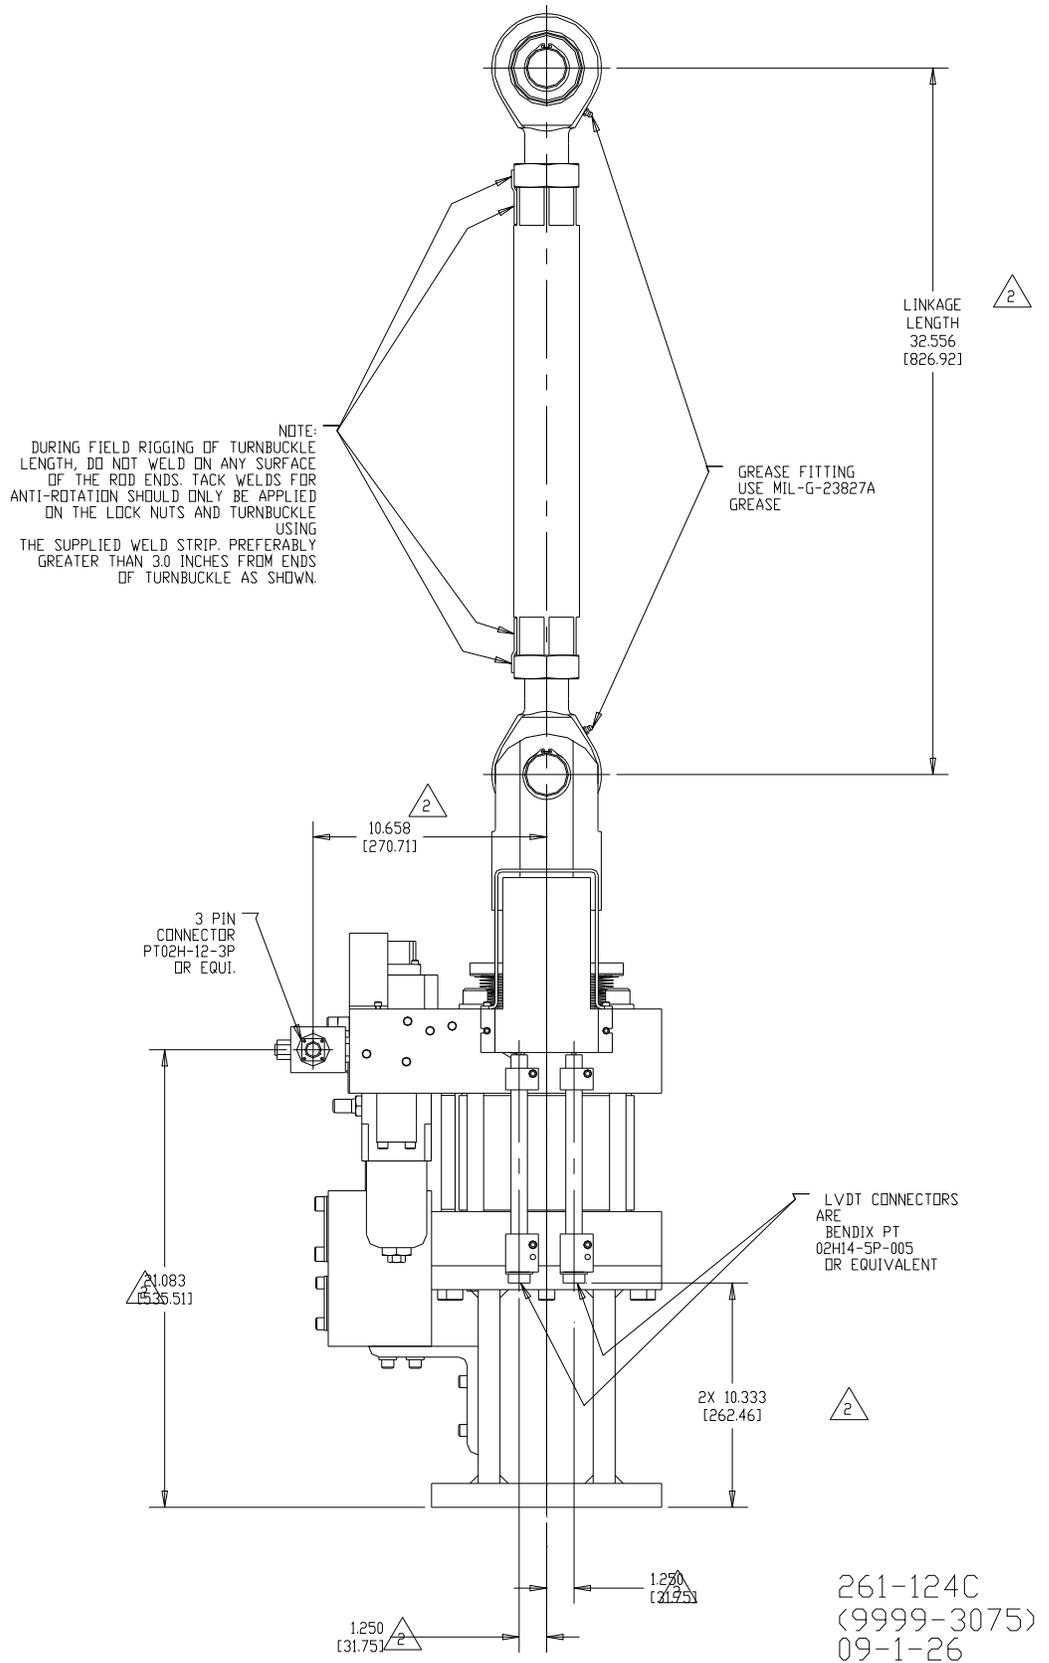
9F IGV Actuator with Electric Trip and SAE CODE 61 flange type connection (right side view)
